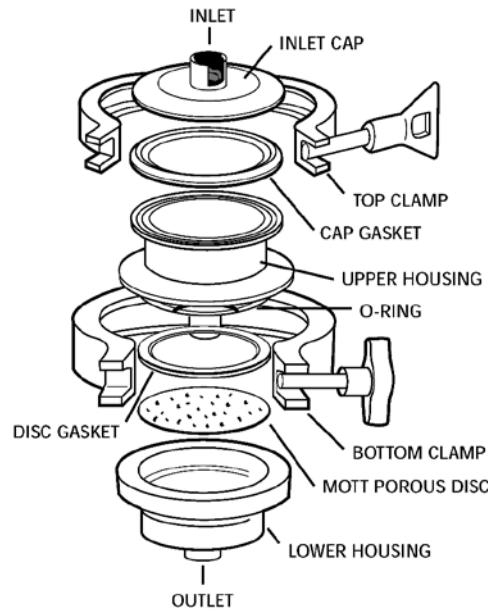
Mott 70-mm Disc Test Filter Assembly from <https://mottcorp.com>
